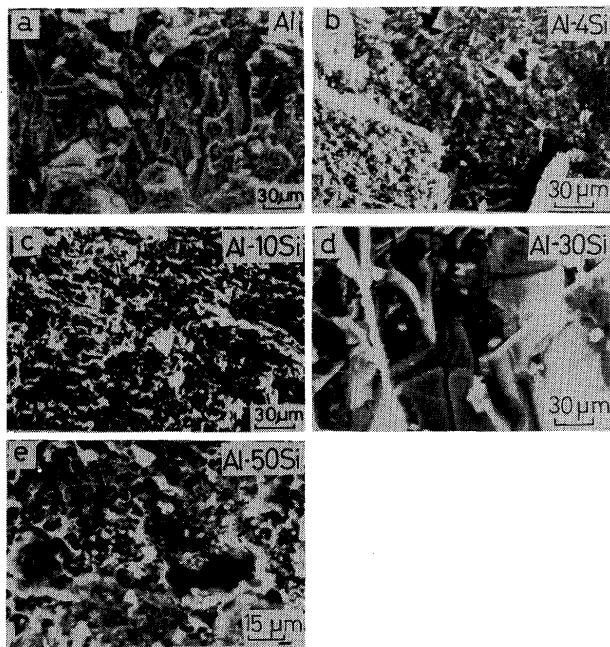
Fracture structure of  $\text{Si}_3\text{N}_4$  joint braze at 1373 K for 3.6 ks with Al-Si alloy filler.
